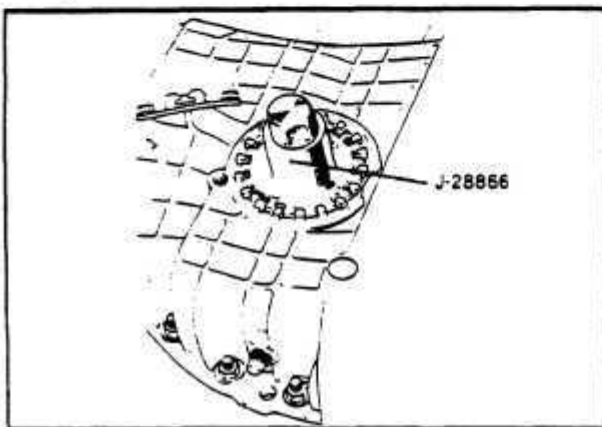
DIFFERENTIAL ADJUSTING NUT TOOL
